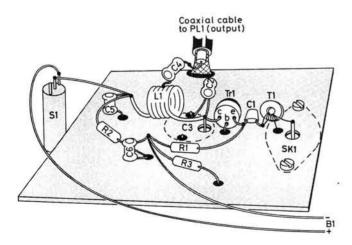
The layout of the components is critical and this drawing should be followed for the best results. The picture on the right shows the completed prototype amplifier
